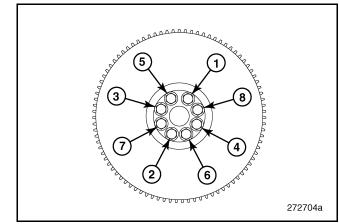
Camshaft Vibration Damper Tightening Sequence
